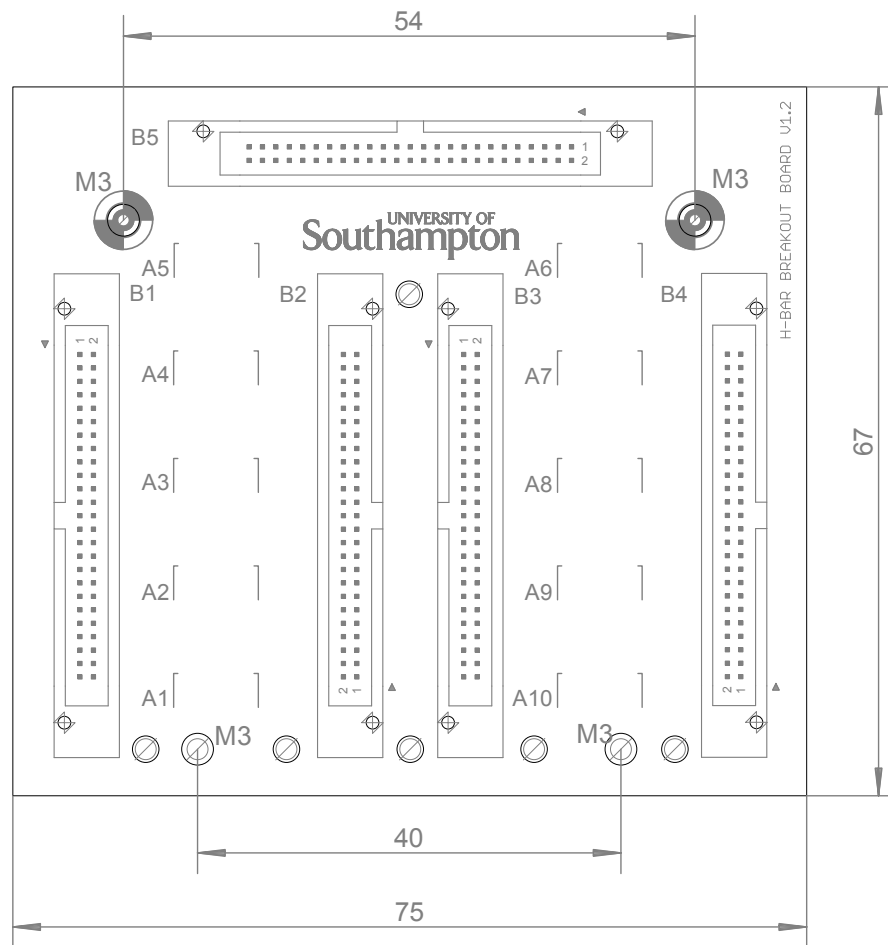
Breakout PCB v1.2 Dimensions (Top silkscreen layer)
